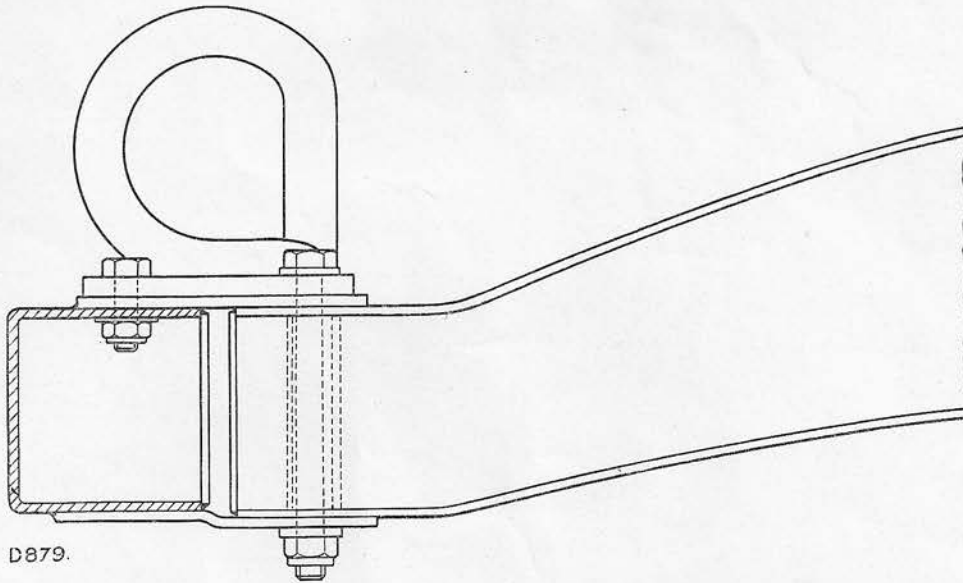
Lifting and towing rings Part No. 267950; these are fitted at the front on the chassis frame.
